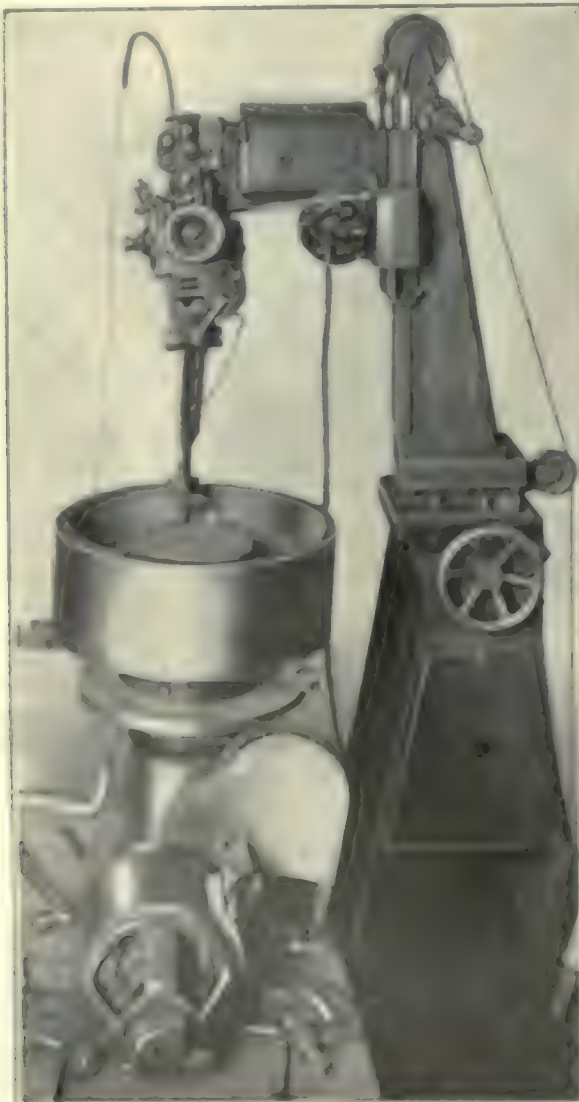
WELDING TOGETHER SOLENOID BRAKE
